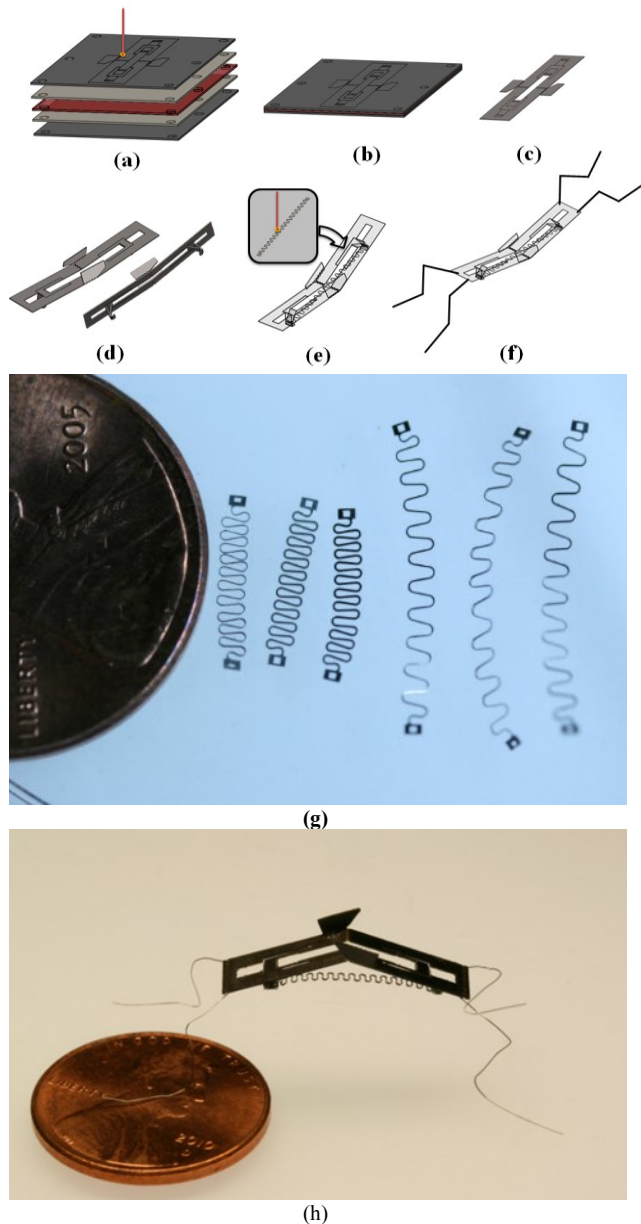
Manufacturing process of the robot structures (a)-(f), the sheet SMA actuators cut by the UV Laser (g), the final prototype (h).
